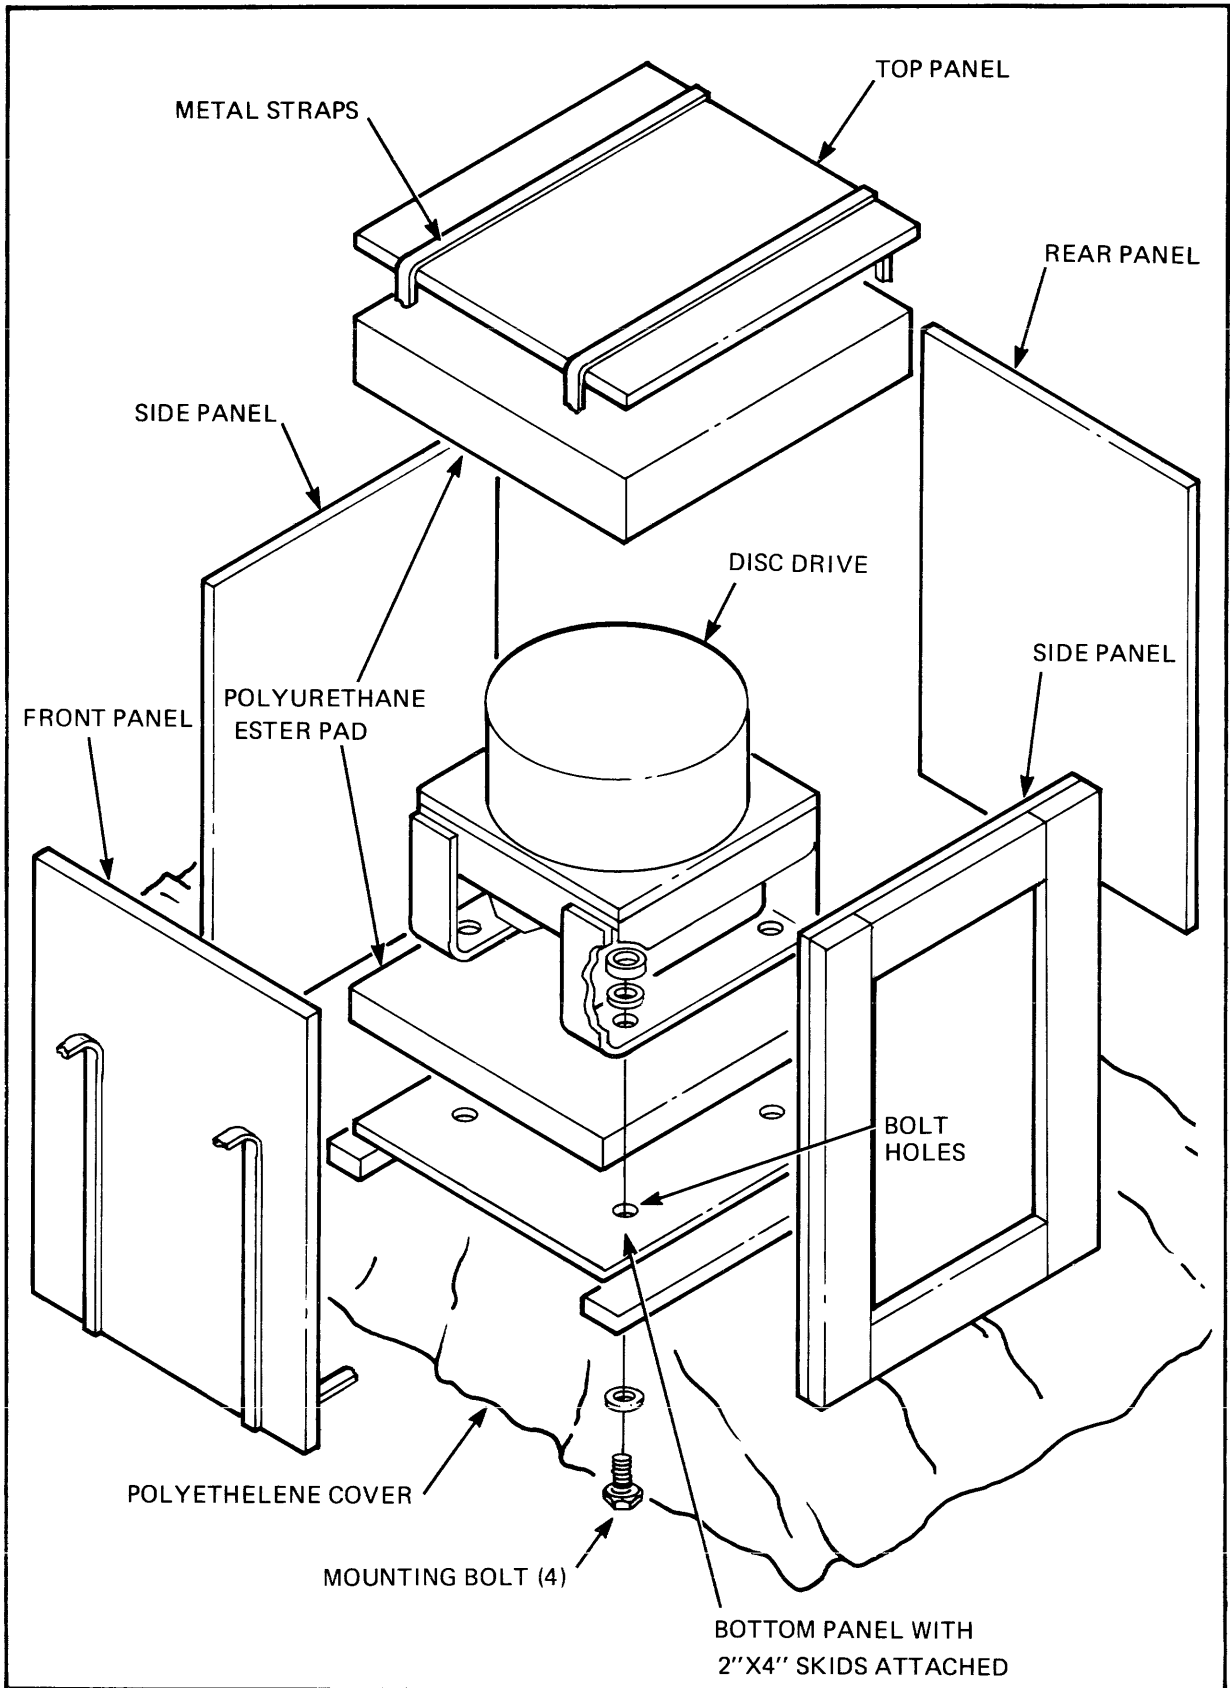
HP 2660A Disc Drive Shipping Materials (Exploded View)
